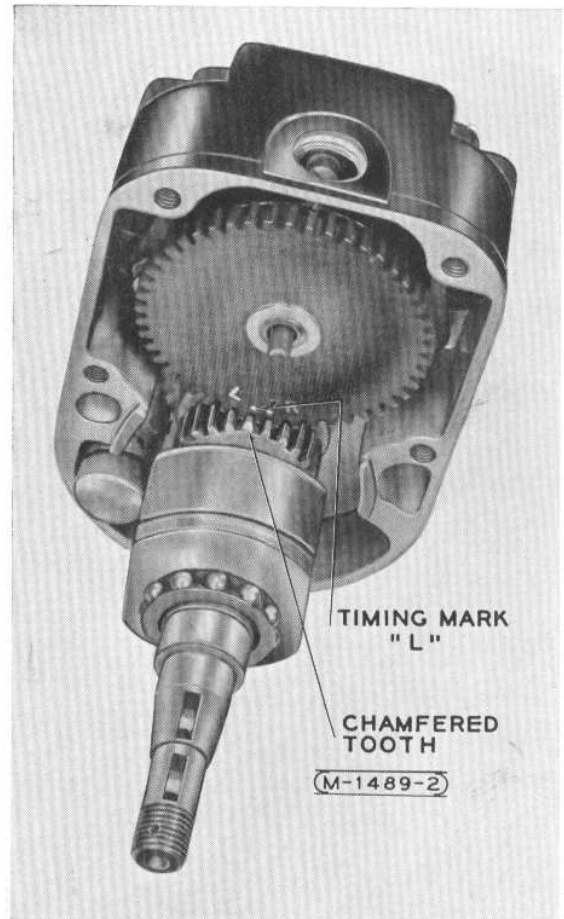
B. Correct Meshing of Distributor Gears—Anticlockwise Magneto
